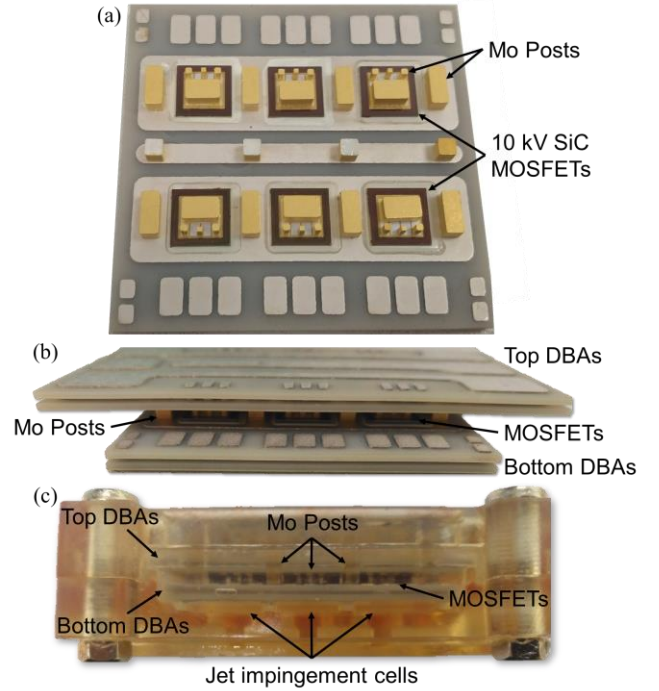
Assembled module with (a) 10 kV SiC MOSFETs and Mo posts, (b) stacked DBA substrates, and (c) the housing and integrated jet-impingement cooler.
